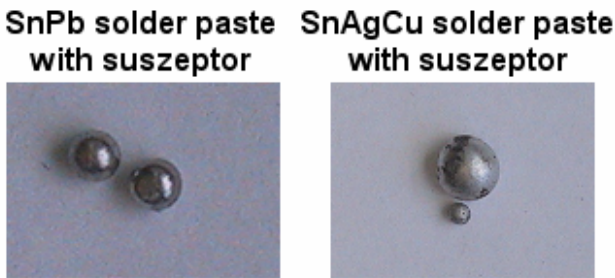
Results of solder melting trials with suszeptor solder pastes, heated by microwave
